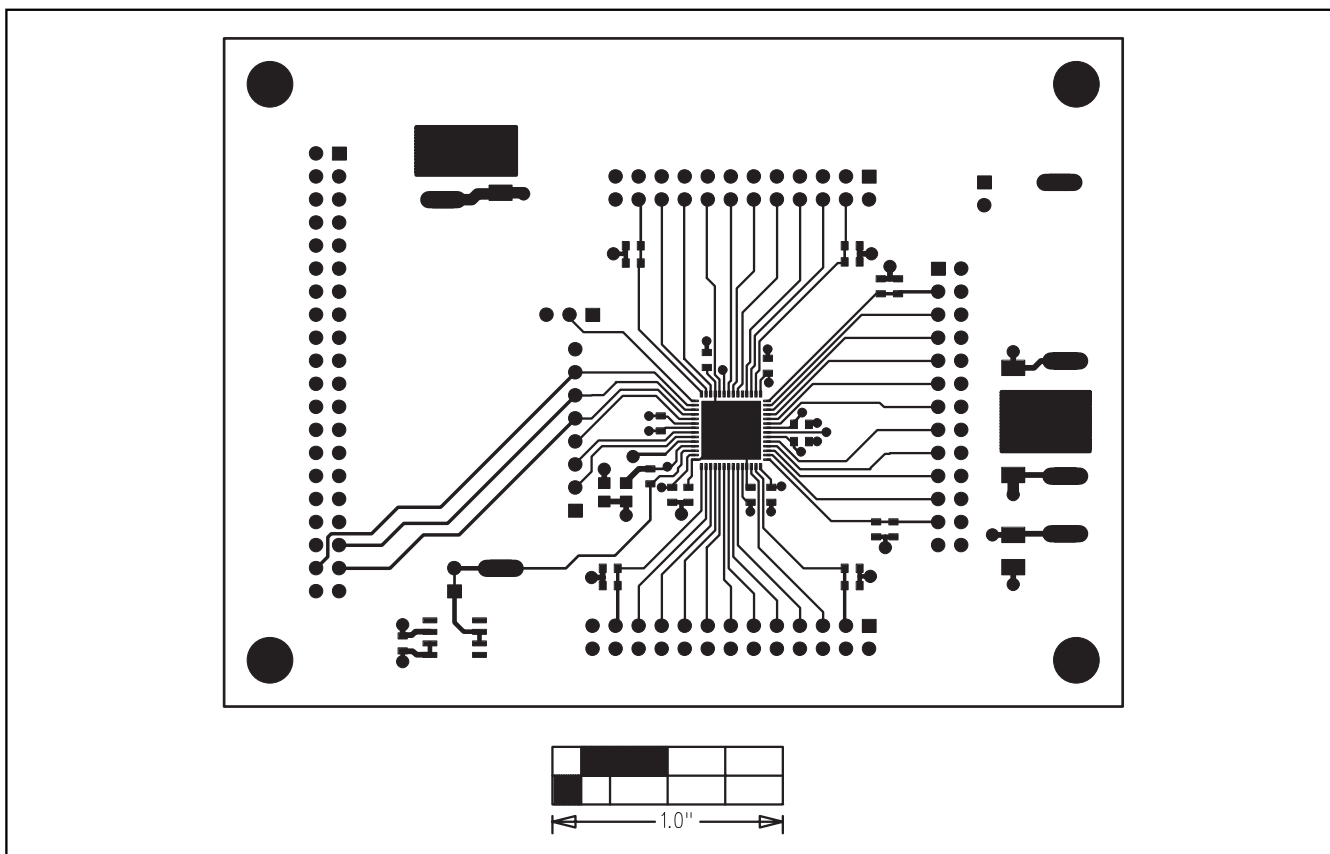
MAX5734 EV Kit PC Board Layout—Component Side
